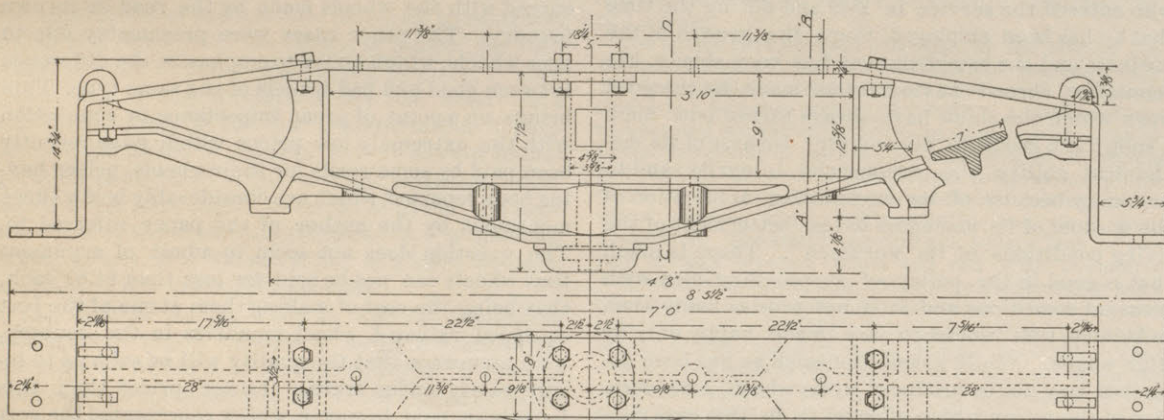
PLAN AND ELEVATION OF CAST STEEL BODY BOLSTER.
